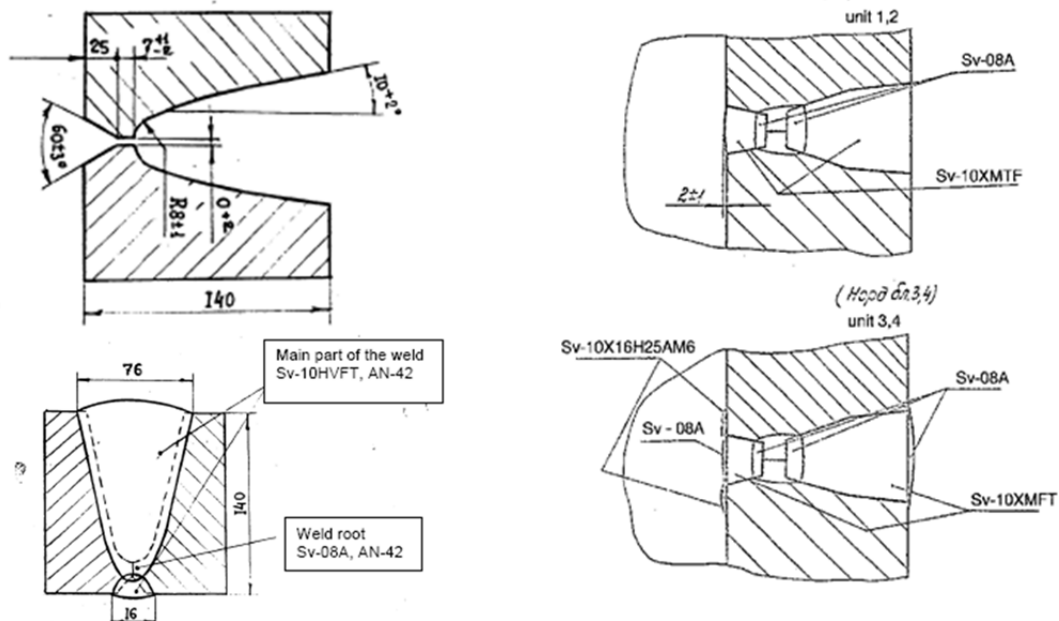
Shape and welding sequence of the beltline multilayer welding seams SN0.1.4. of the Greifswald WWER-440/V213 RPVs [Boehmer-1999].
